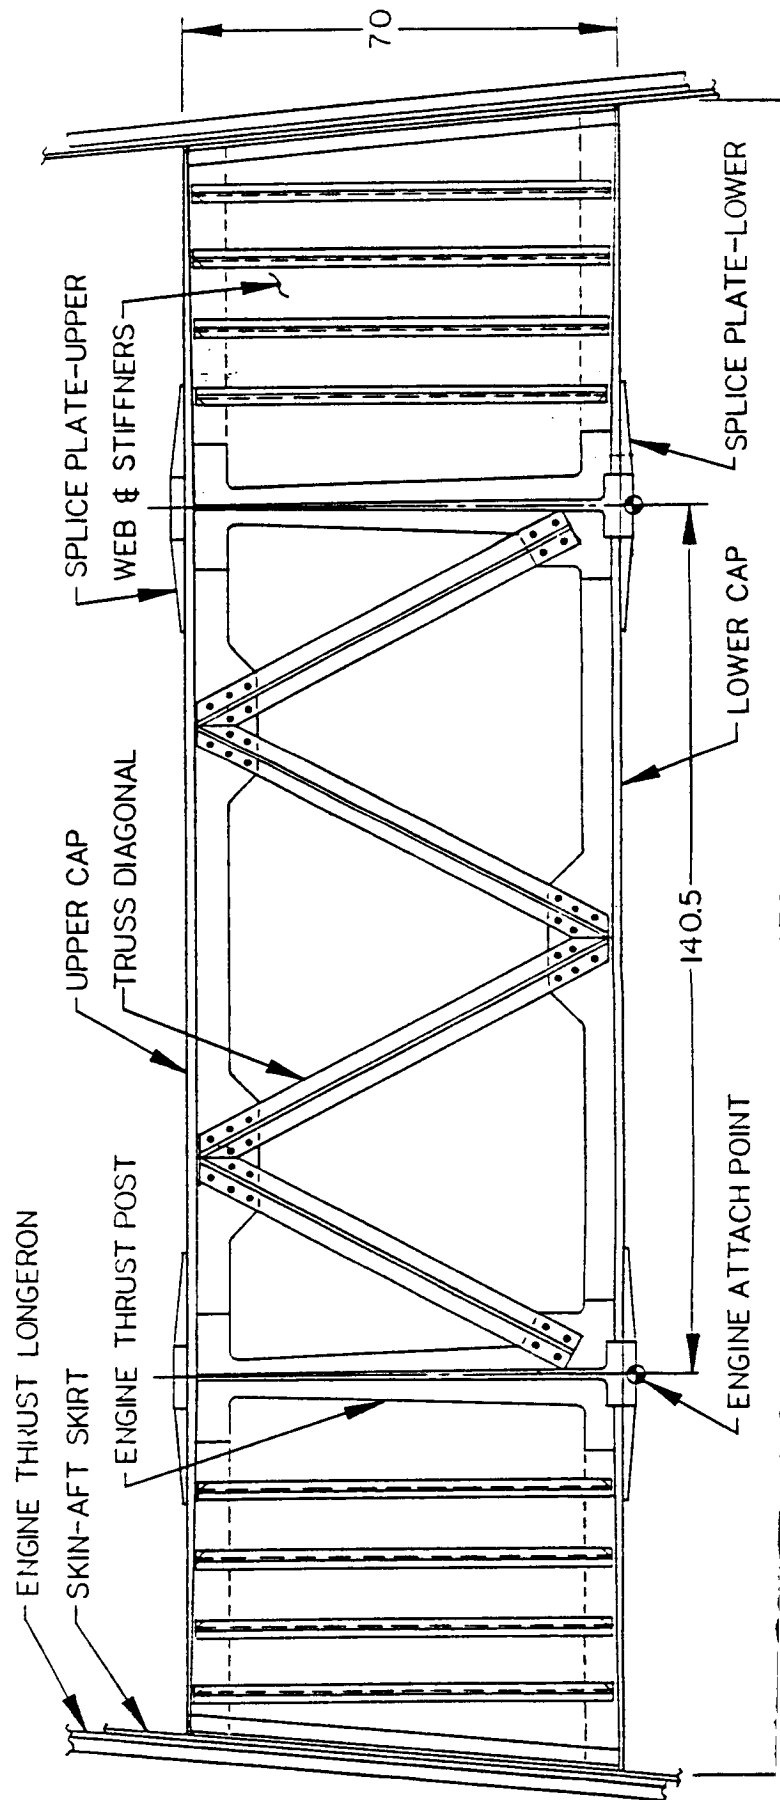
Aft Skirt Structure and Engine Installation-Rear View
